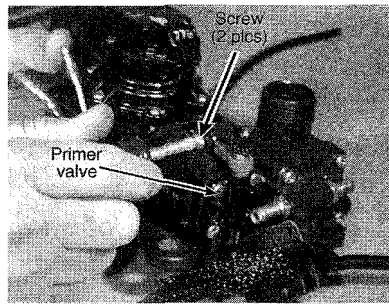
Remove the 2 screws securing the primer valve to the bracket
